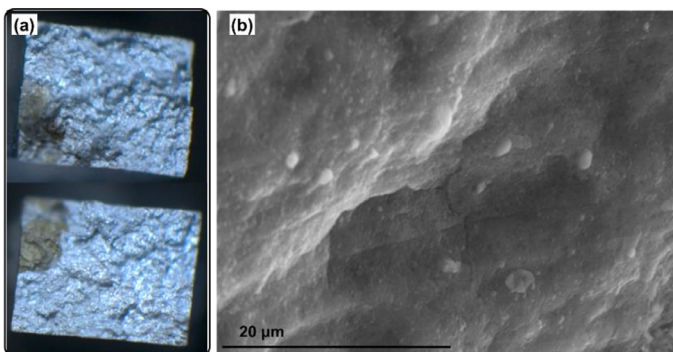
(a) A pair of the fracture surfaces of a AZ91 alloy tensile test bar, produced in an atmosphere of SF₆/CO₂. The dimension of the fracture surface is 5 mm × 6 mm, (b) surface appearance of the oxide films on the fracture surfaces, showing spots on the film surface.
